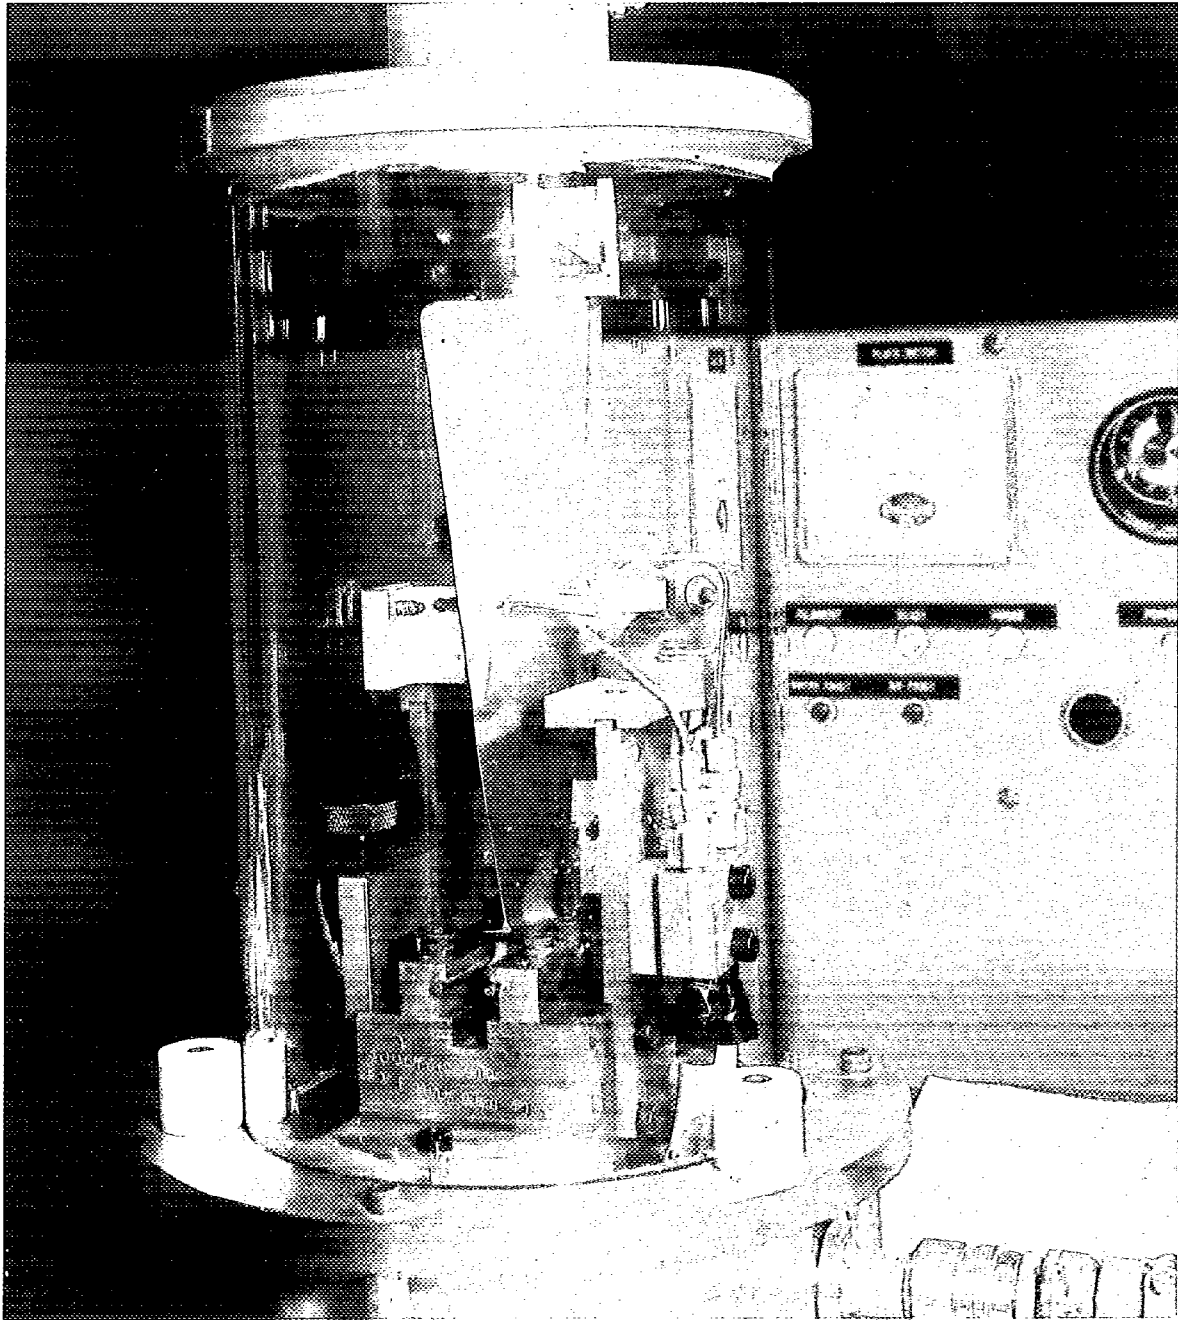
Example of Vacuum Induction Brazing. A Tungsten Carbide Wear Pad is Being Brazing to A Titanium Compressor Blade
